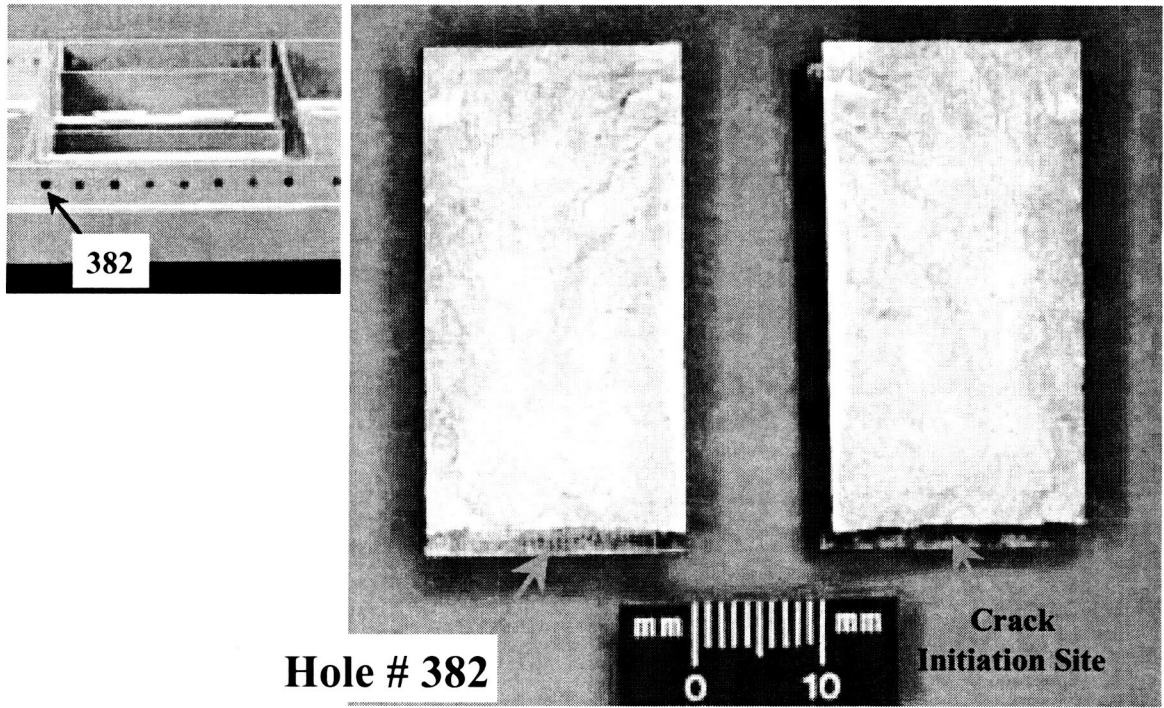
The photograph shows both surfaces of the crack emanating from fastener hole #382. The location of fastener hole # 382 is shown in the small photograph.
